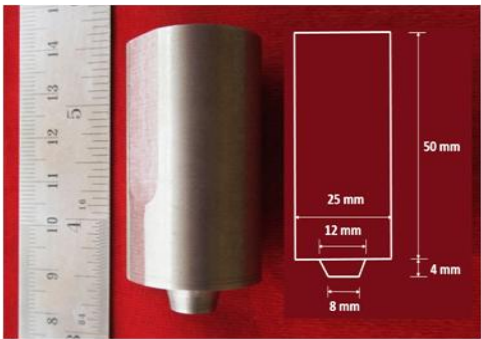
Photograph of Tungsten Based Alloy Tool and Tool Dimensions
